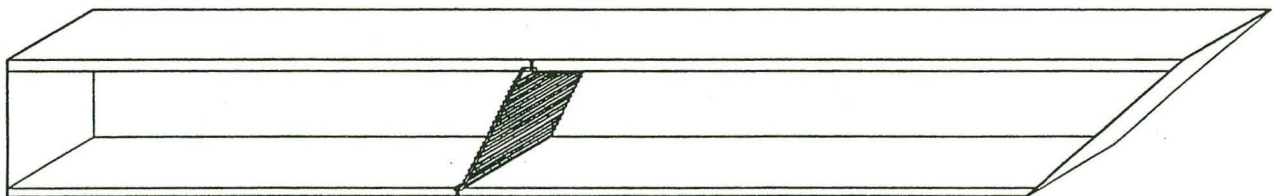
C-4. The design chosen for the structural support of the barrel EMC modules. The mechanical structure utilizes back plates of 30-mm stainless steel and a 20-mm-thick aluminum front plate. Type 304 stainless steel end plates 3-mm thick and a 6-mm-thick stainless steel bulkhead at  $\eta \sim 0.5$  provide additional support. The lead absorber sheets (not shown) are half the full module length and are captured by fixtures at the ends and middle of the module.
